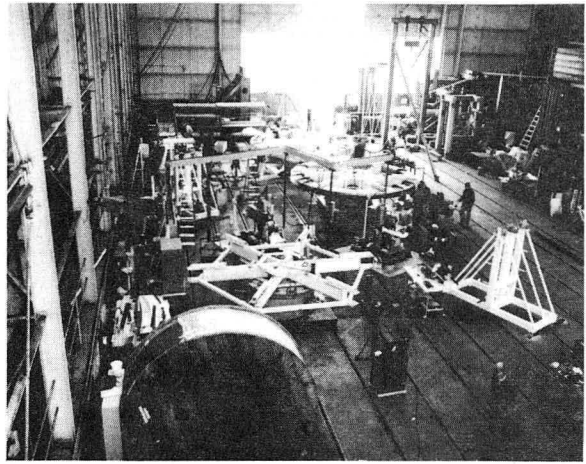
Setup of the two solenoid winding lines at General Dynamics. Shown are the special "spider fixtures" used to support the U-shaped coil form during winding and close-out welding.
